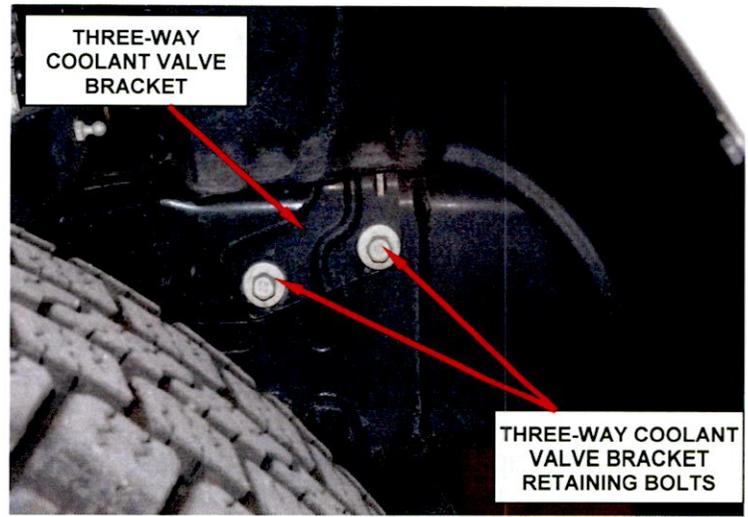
Retaining Bolts Viewed Through Right Front Wheel Opening
